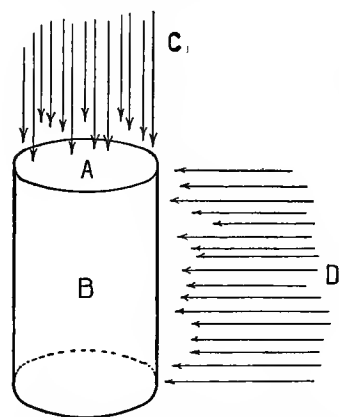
Viewing Cylinder to Get Plan and Elevation
